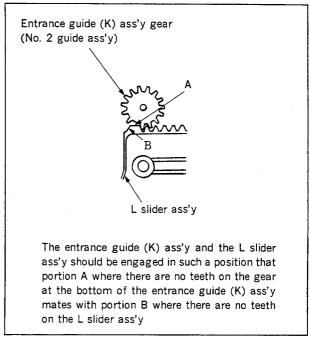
Engaging the entrance guide (K) ass'y gear
